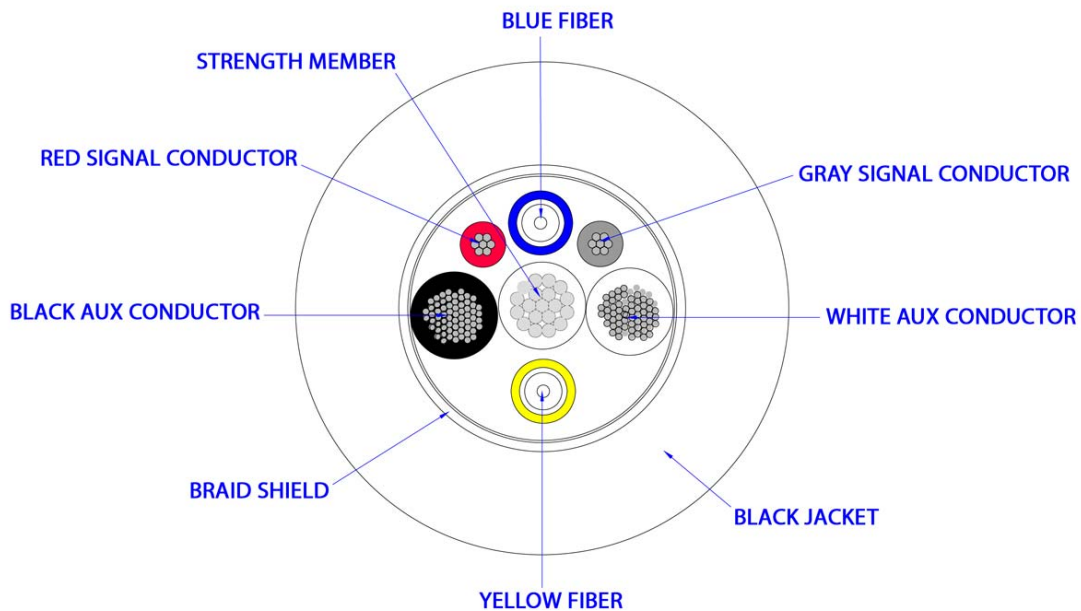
Configuration for 2 auxiliary conductor cable types (Plug end)
